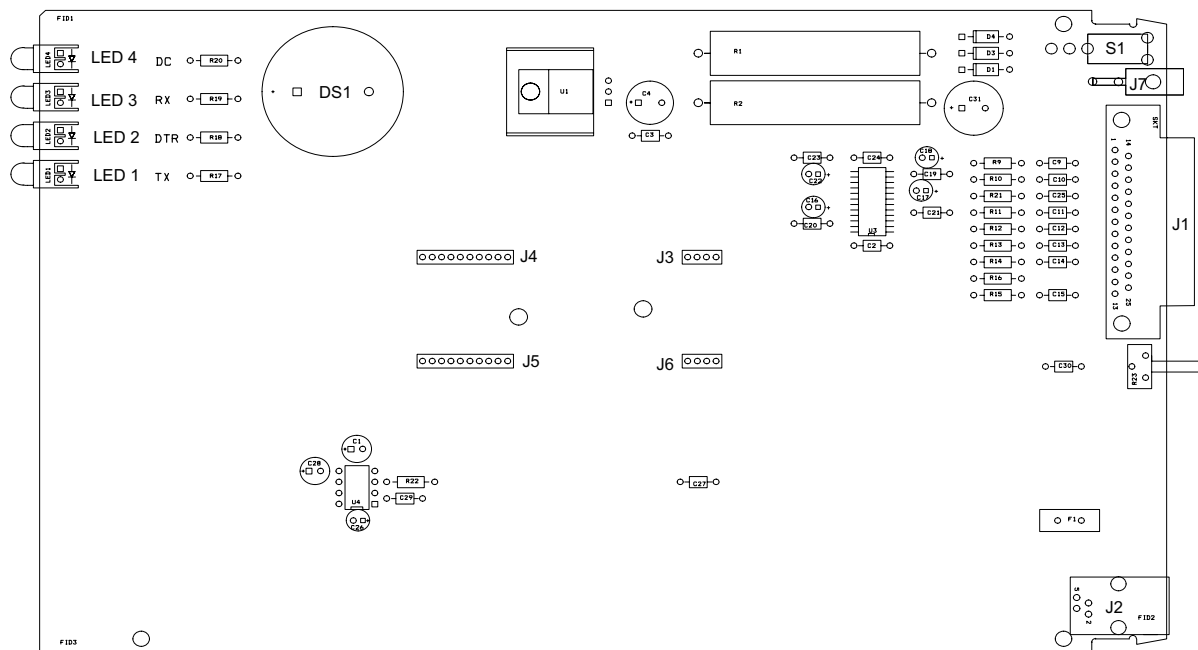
A. MT5634SMI Test/Demo Board (Rev. B)
